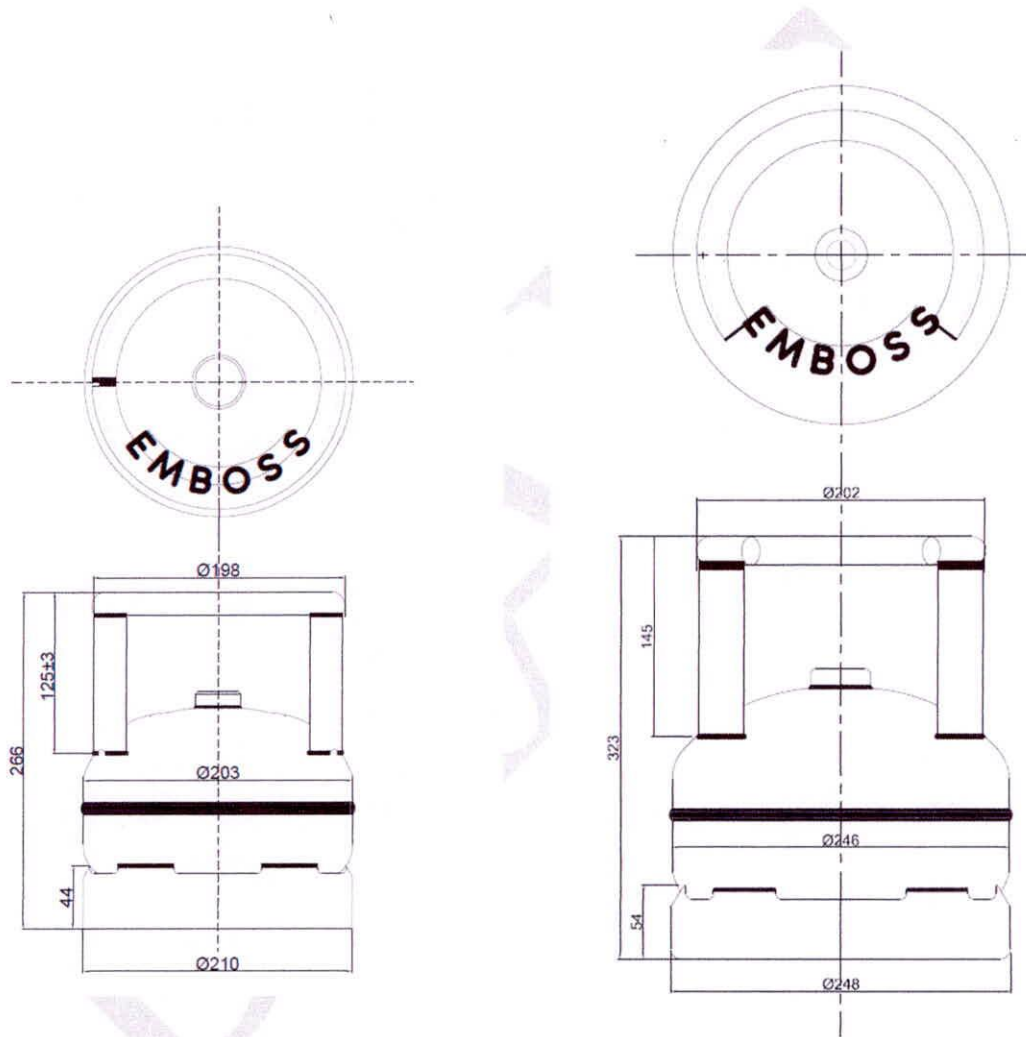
1.4 kg 203 mm diameter assembly details
